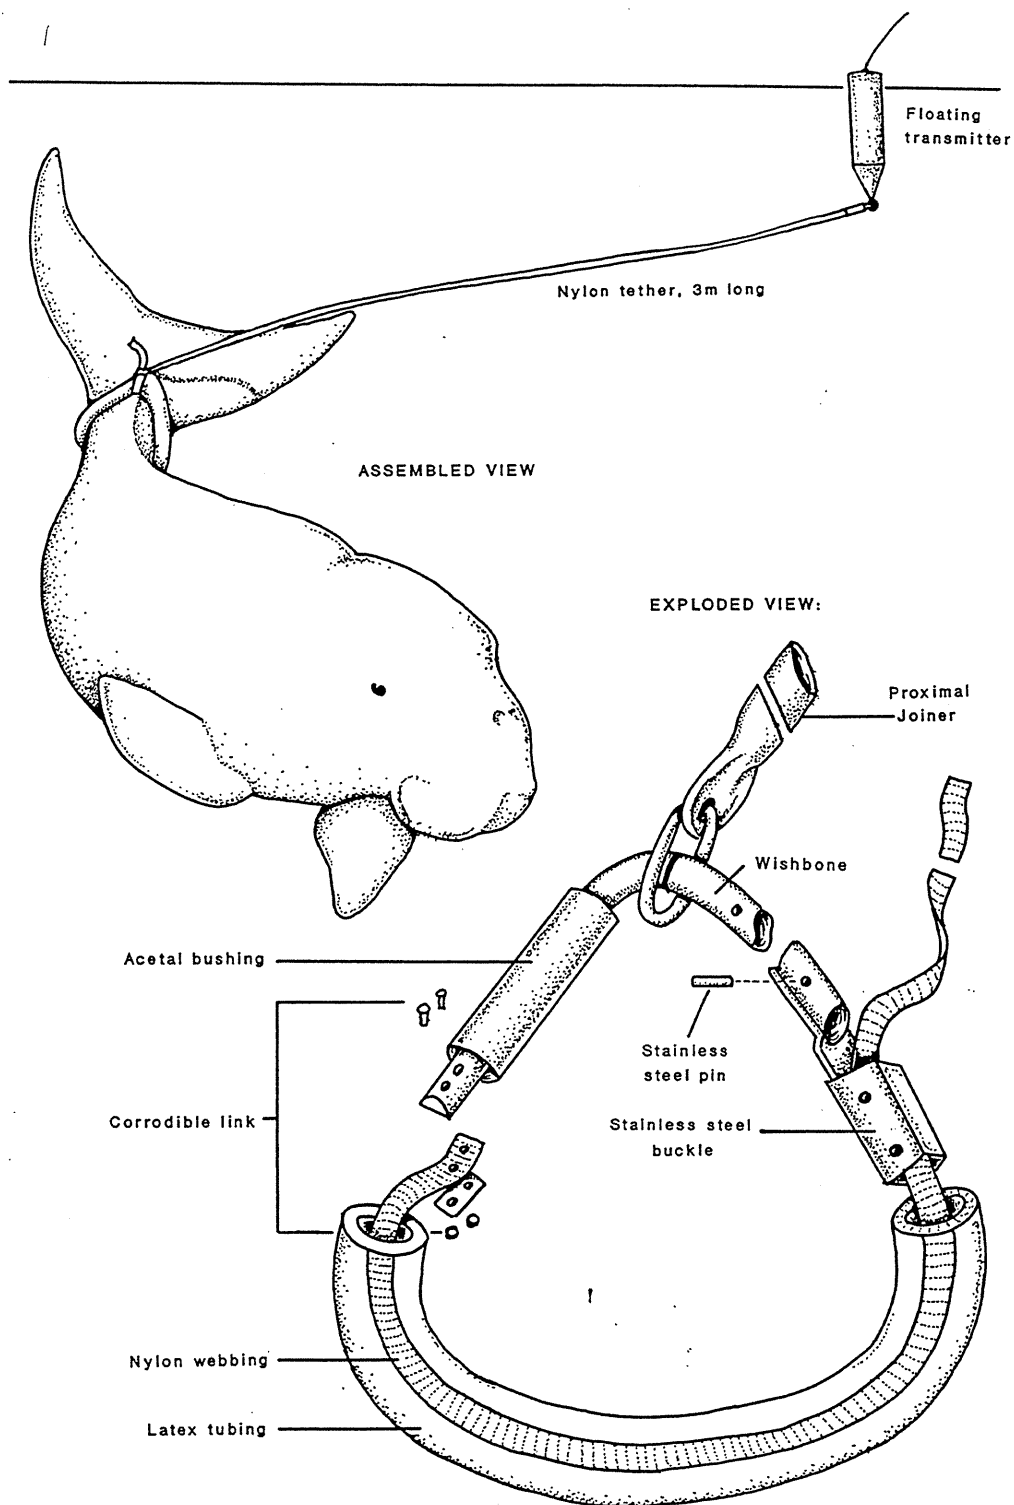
Assembly used to attach a radio-transmitter to a dugong.
